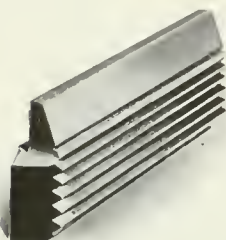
Type of Chaser used in Solid Adjustable Die-head
